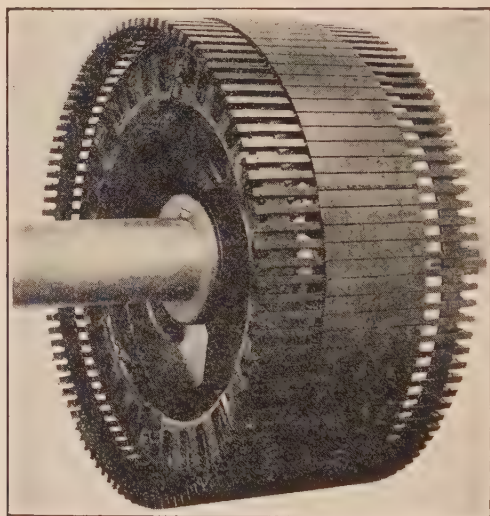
Squirrel-cage rotor, showing welded end rings.
